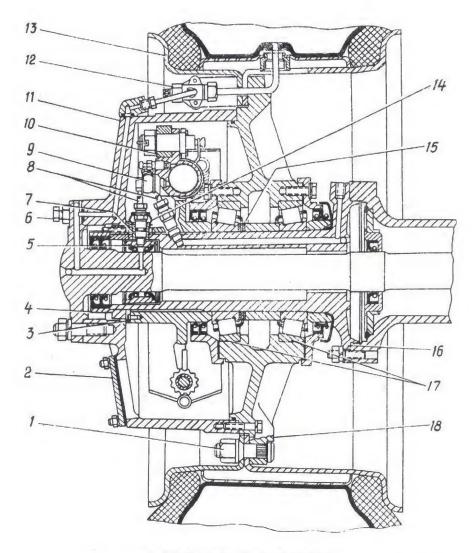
REAR WHEEL (SECTIONAL VIEW)
